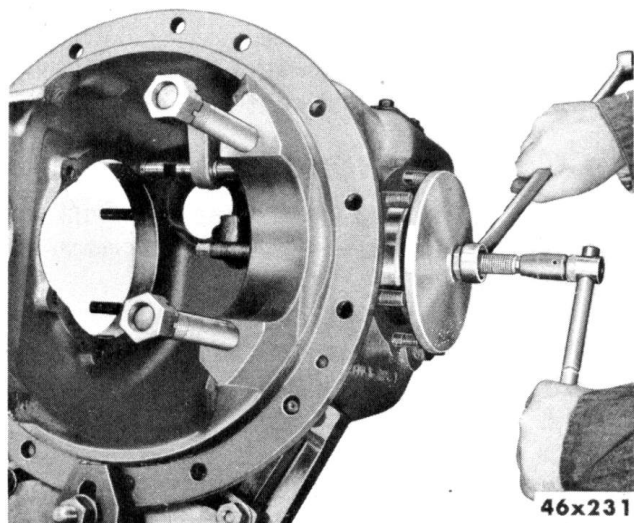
Removing Differential Cross Shaft Cap Bearing Cup—Tool DD-967
